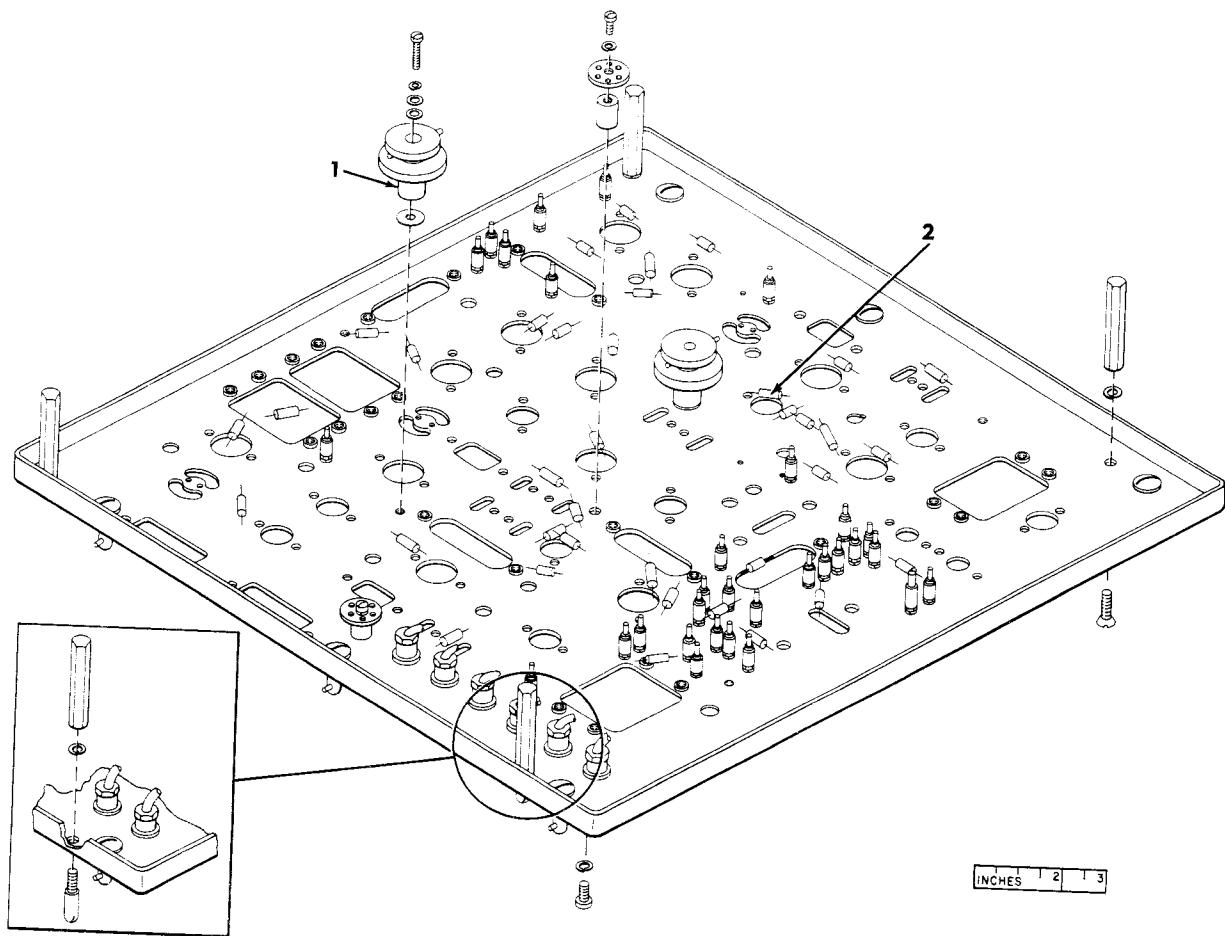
Coder, radar, guided missile (8159347) - partial exploded view
